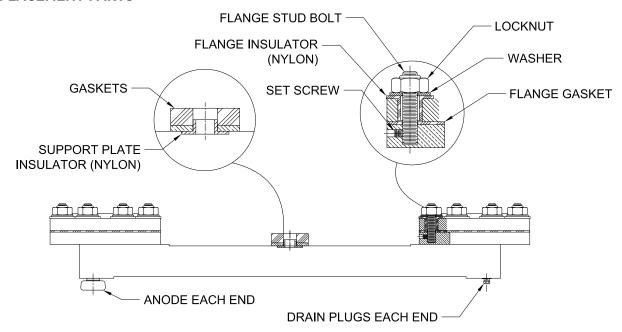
Z-Option Single Pass Gridcooler Keel Cooler
